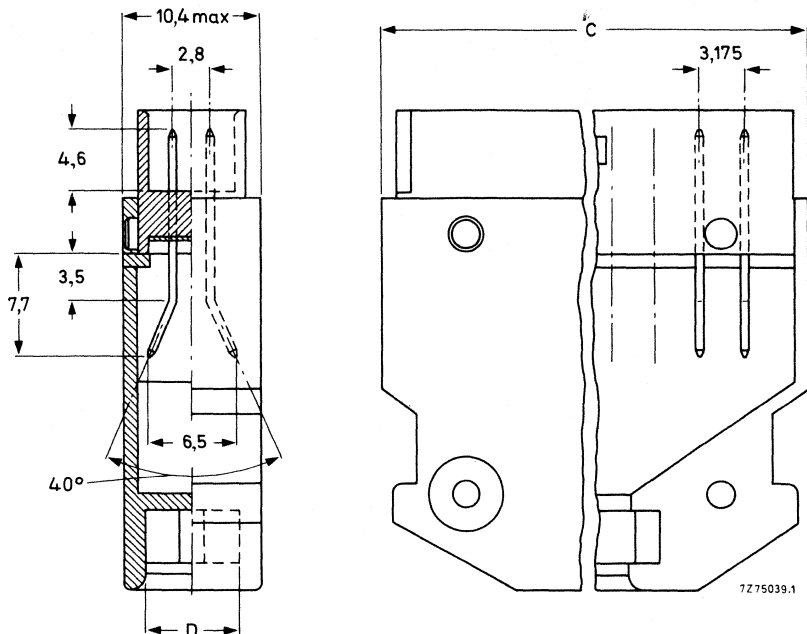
Test cord plug with cable hood. See Table 4 for dimensions C and D.
